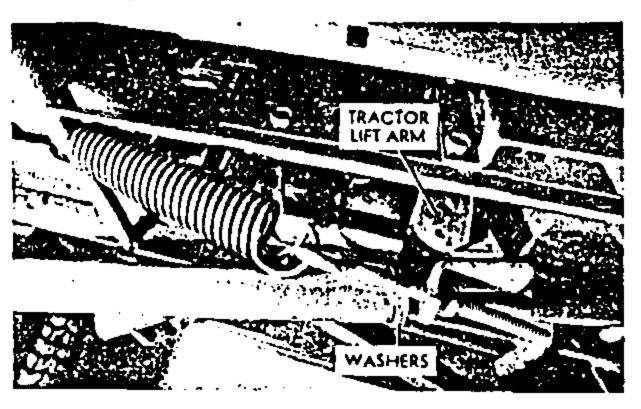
Lift Rod and Spring Assist Mounting BELT INSTALLATION (Fig. 22)
